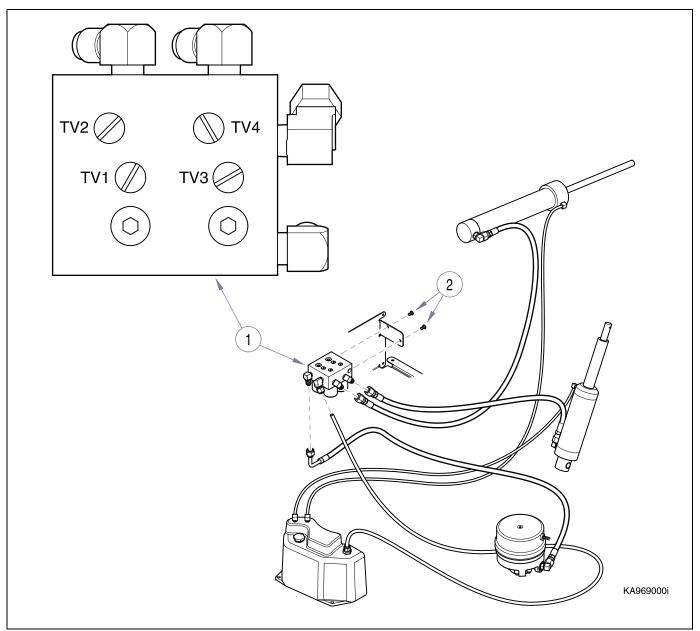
Hydraulic Solenoid Valve Assembly.
